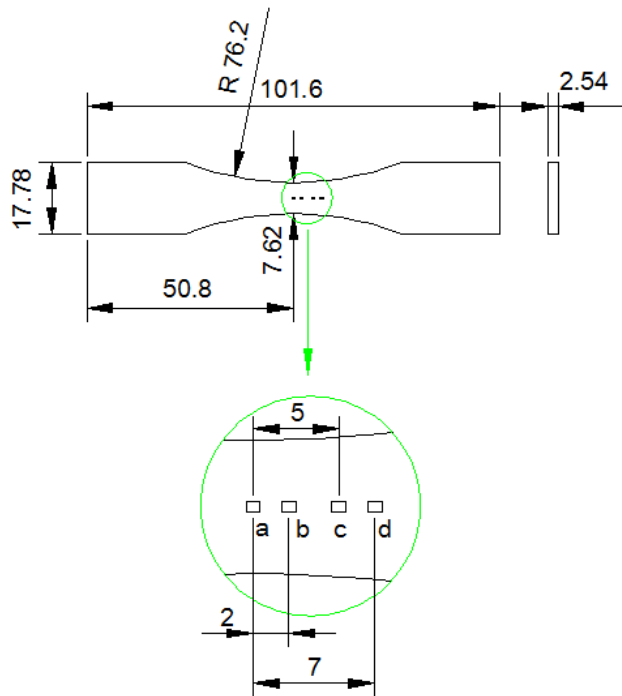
Fatigue specimen: specimen drawing (all units in mm).
